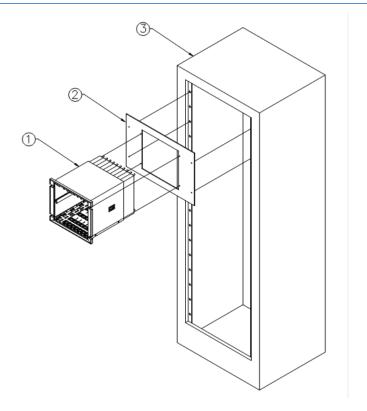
3500 Mini-rack mounting dimensions for the Panel Mount Configuration
